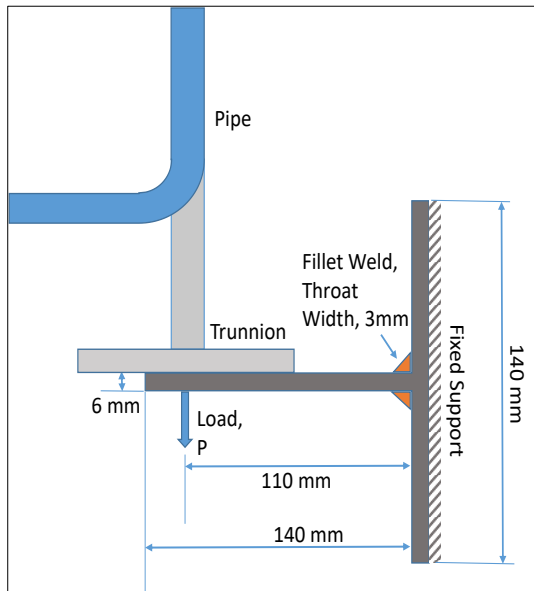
Schematic of fillet welded joint with specifications
